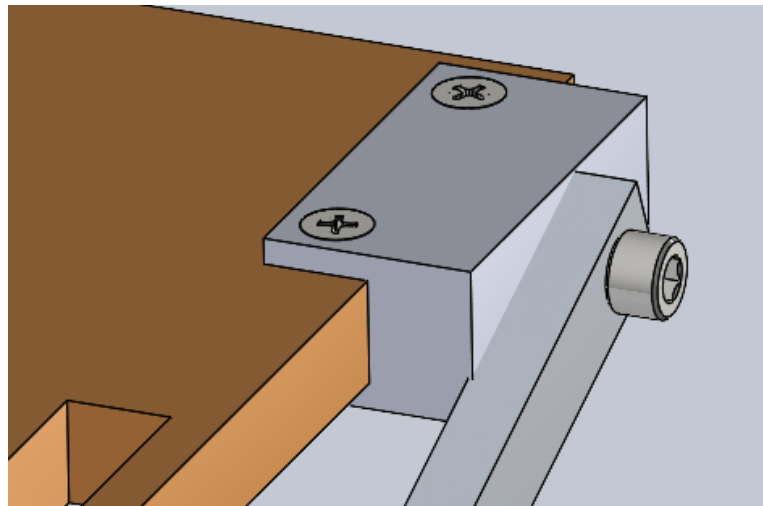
The addition of an aluminum bracket on the side will prevent the early failure of the scissor link supports during weight testing.
